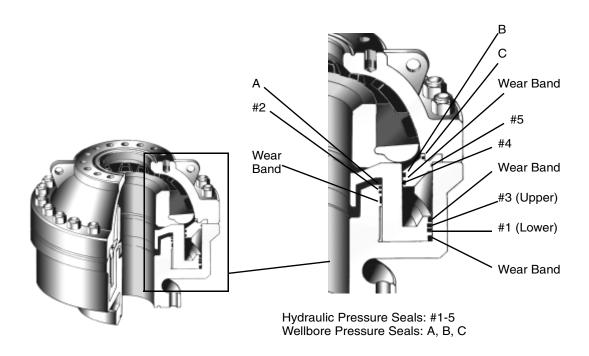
Seal Positions - 10,000 psi (690 bar) Model
